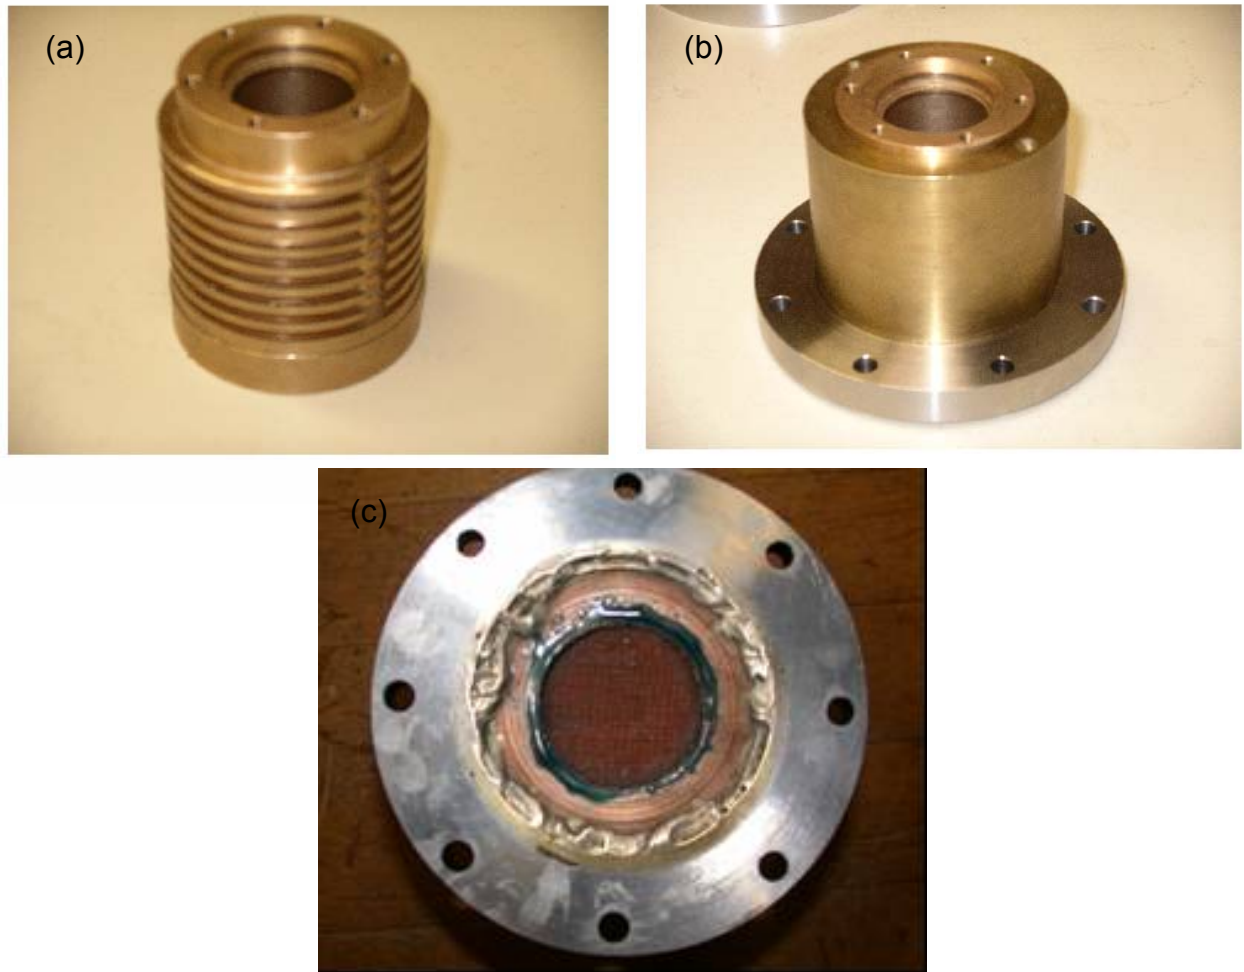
The pulse-tube (a), flanges (b), and assembly (c).
